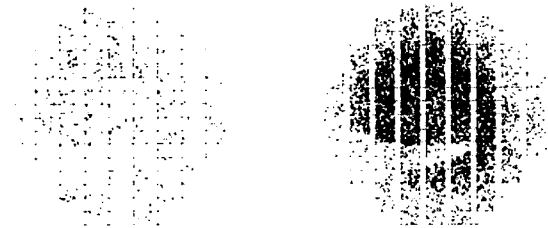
Observed defect counts on the same wafer. (a) with old tool, (b) with new inspection tool.
